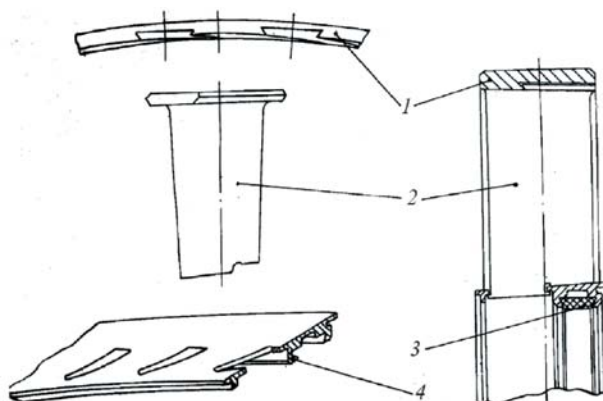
Low-pressure compressor guide device of the D050 engine [15]:
